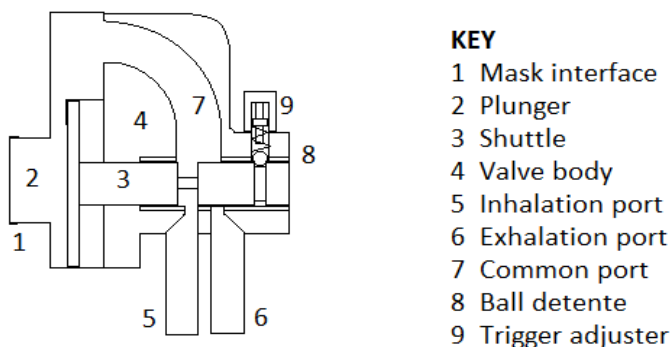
Sectional view of Shuttle Aspiration Valve (SAV)
